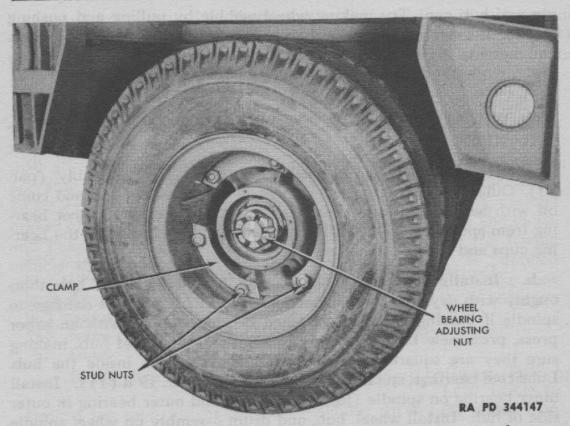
Rear Wheel and Tire, Hub Cap Removed
